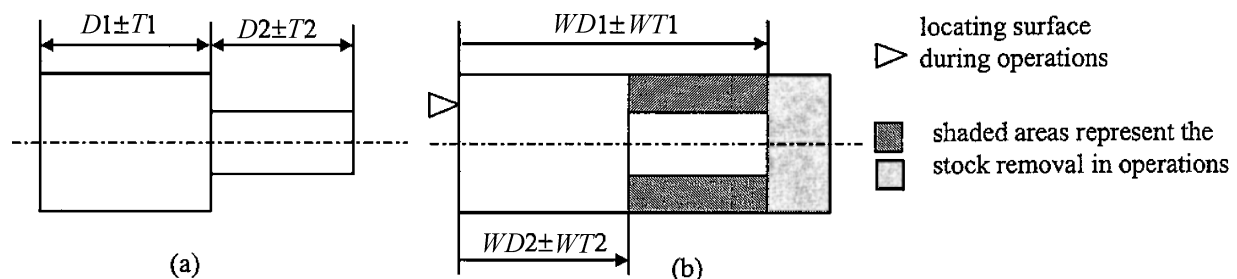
(a) Design tolerance; and (b) manufacturing tolerance.
